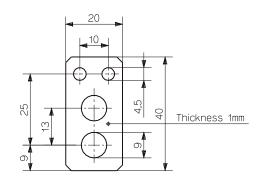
Mounting plate (Art. No. 3.520.1015)
